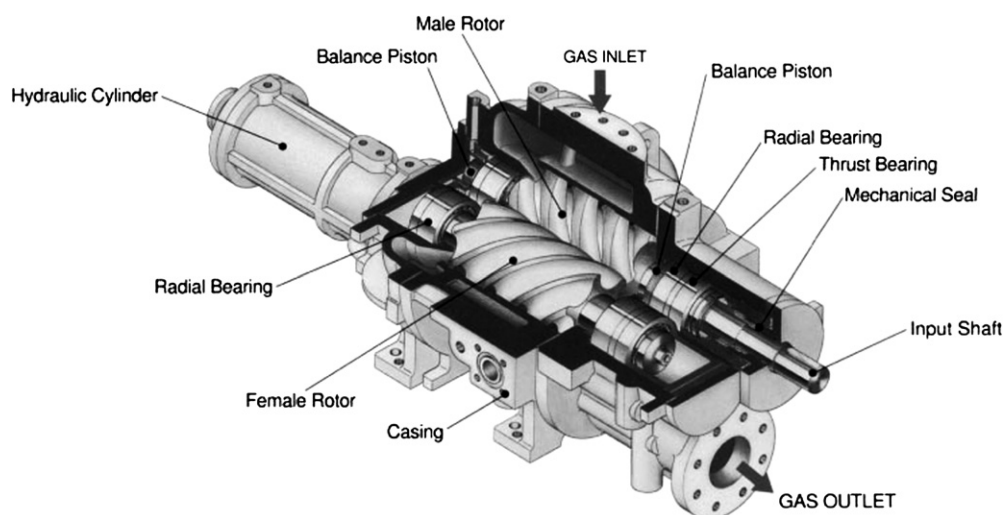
• Flooded screw compressor (Courtesy of Kobelco – Kobe Steel Ltd)
